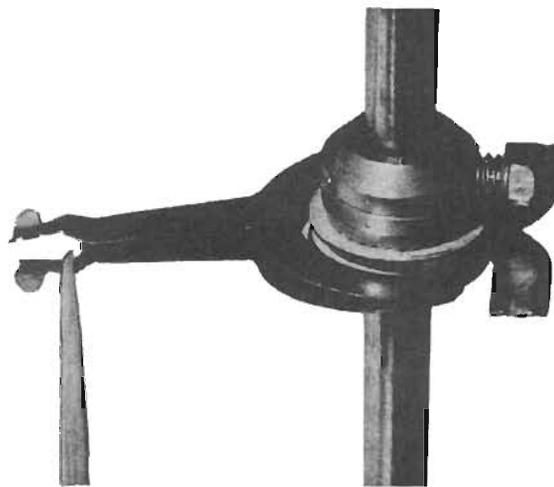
The Above Method is Used When Inspecting Upper and Lower Wiper Tips for Wear.
